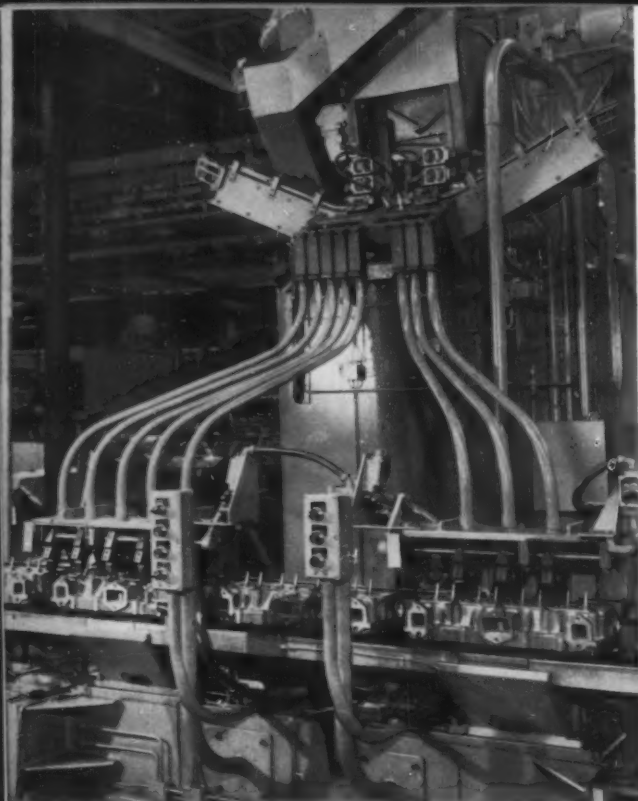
Storage unit, elevator, and chutes are employed at the fourteenth and sixteenth stations to position long bolts, prior to assembly in heads.
